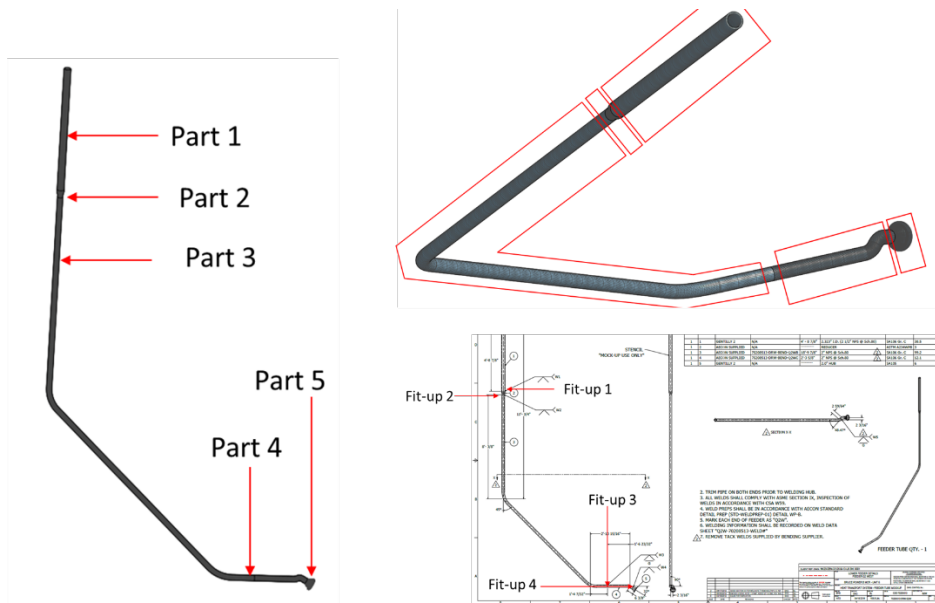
An example feeder tube comprised of 5 parts and four fit-up locations.
